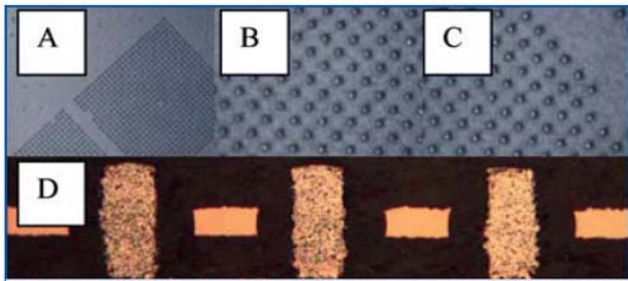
Optical photographs of adhesive filled joining core (A-C) top view, and (D) cross-section [4].
